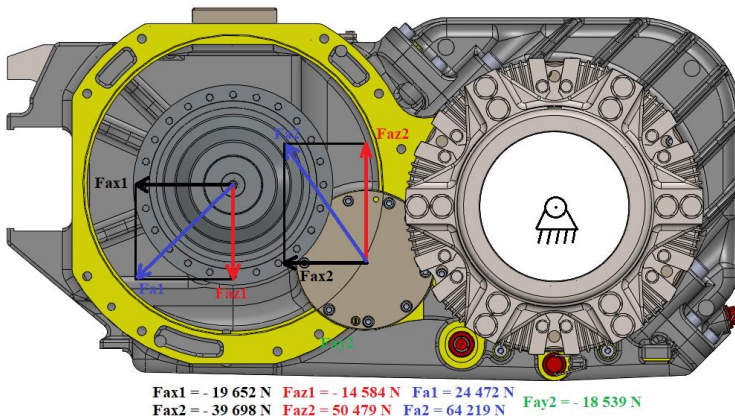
Loads on the 1st and 4th bearings in operating Mode I.
